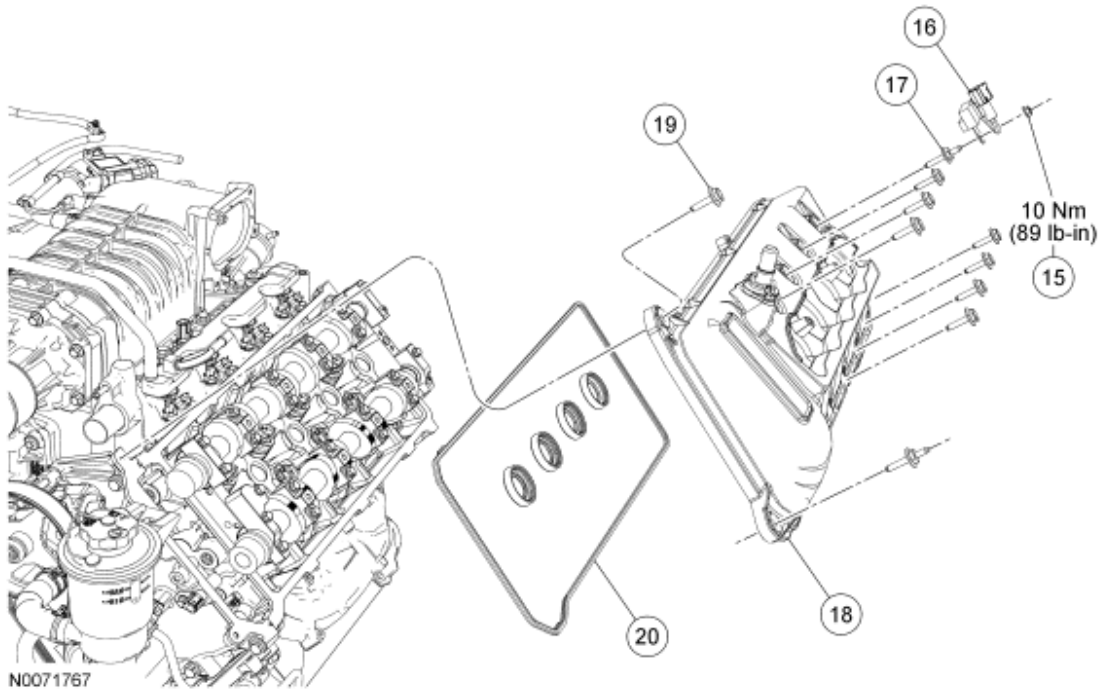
Exploded View Of LH Valve Cover With Torque Specification (2 Of 2)
